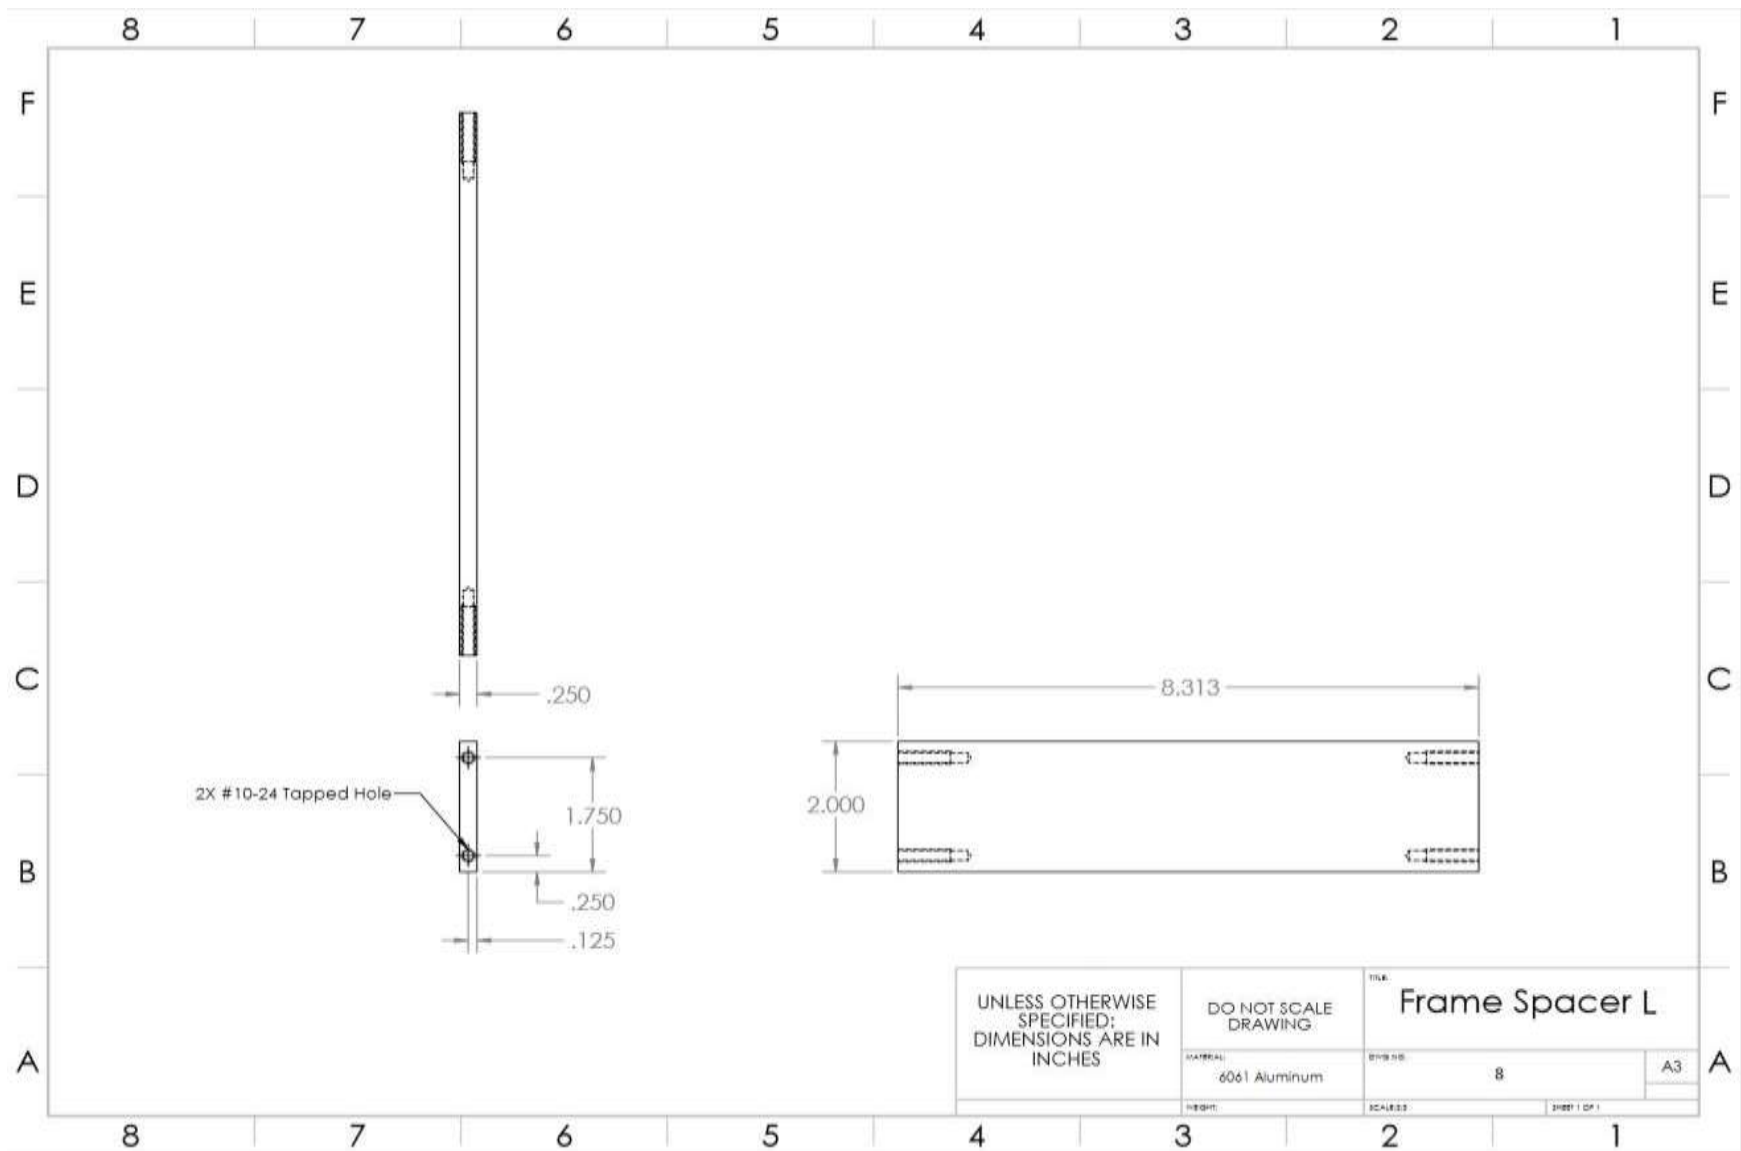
8. Mechanical Drawing of Frame Spacer Long.
